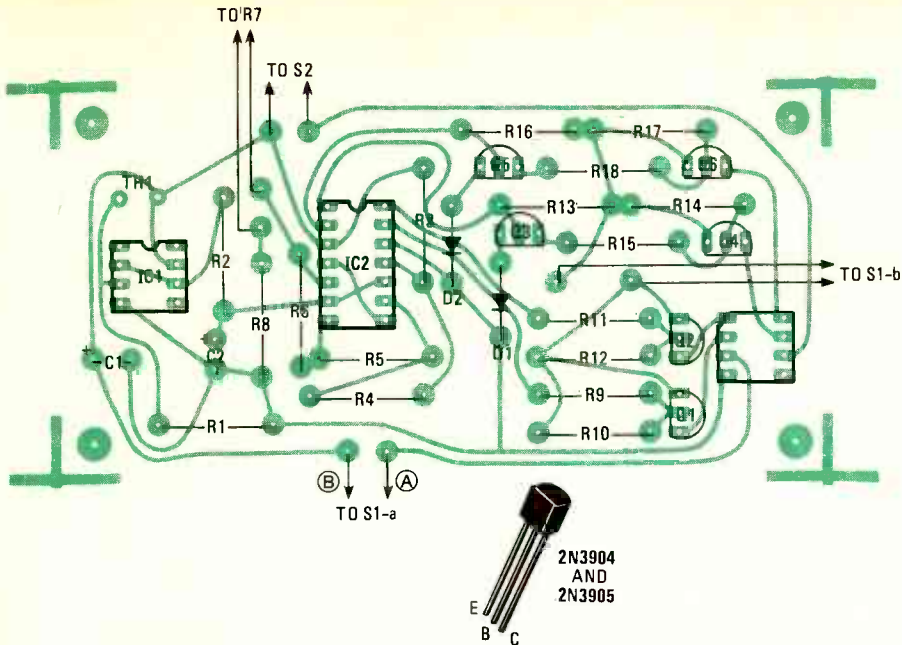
PARTS PLACEMENT DIAGRAM for the thermostat. Unmarked 8-pin (or 1/2 16-pin) socket at lower right is for DIP plug connecting thermostat with the Control Center.
